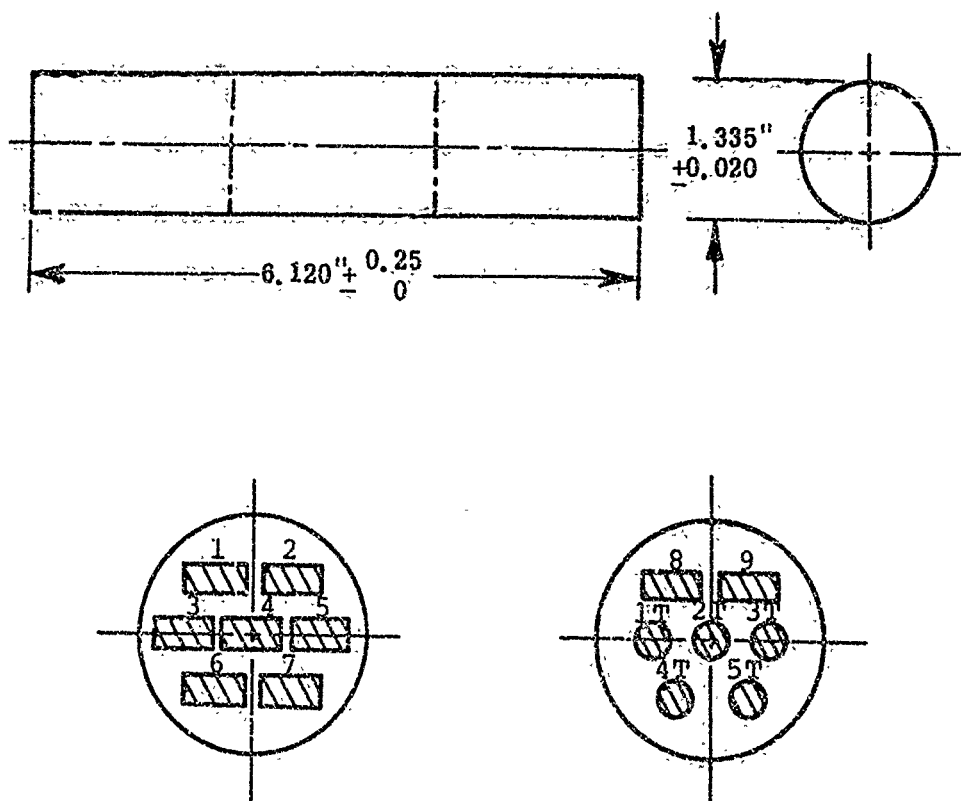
Configuration of Specimen Blank 5A13 as Received from Coors and Cutting Plan for Removing Phase I Tensile and Flexural Specimens from Blanks 5A13-101, -102, and -103
